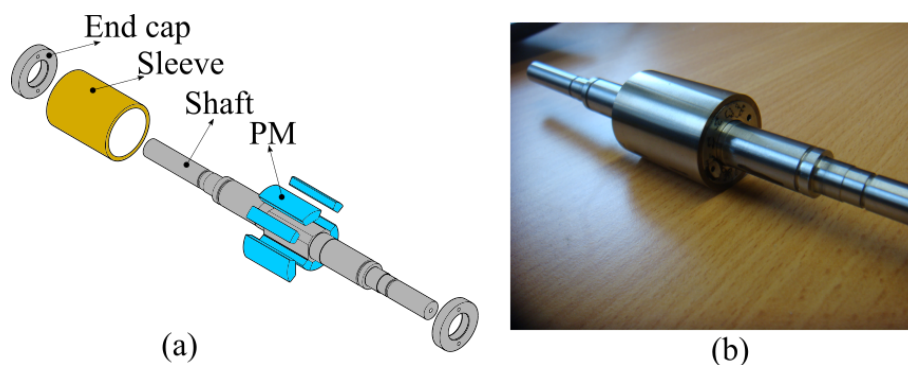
(a) Rotor assembly process; b) assembled rotor.
